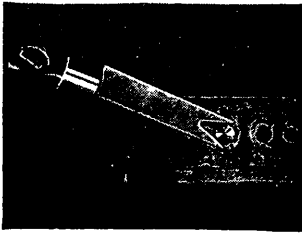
Remove idle adjustment screws and springs and idle port plugs
